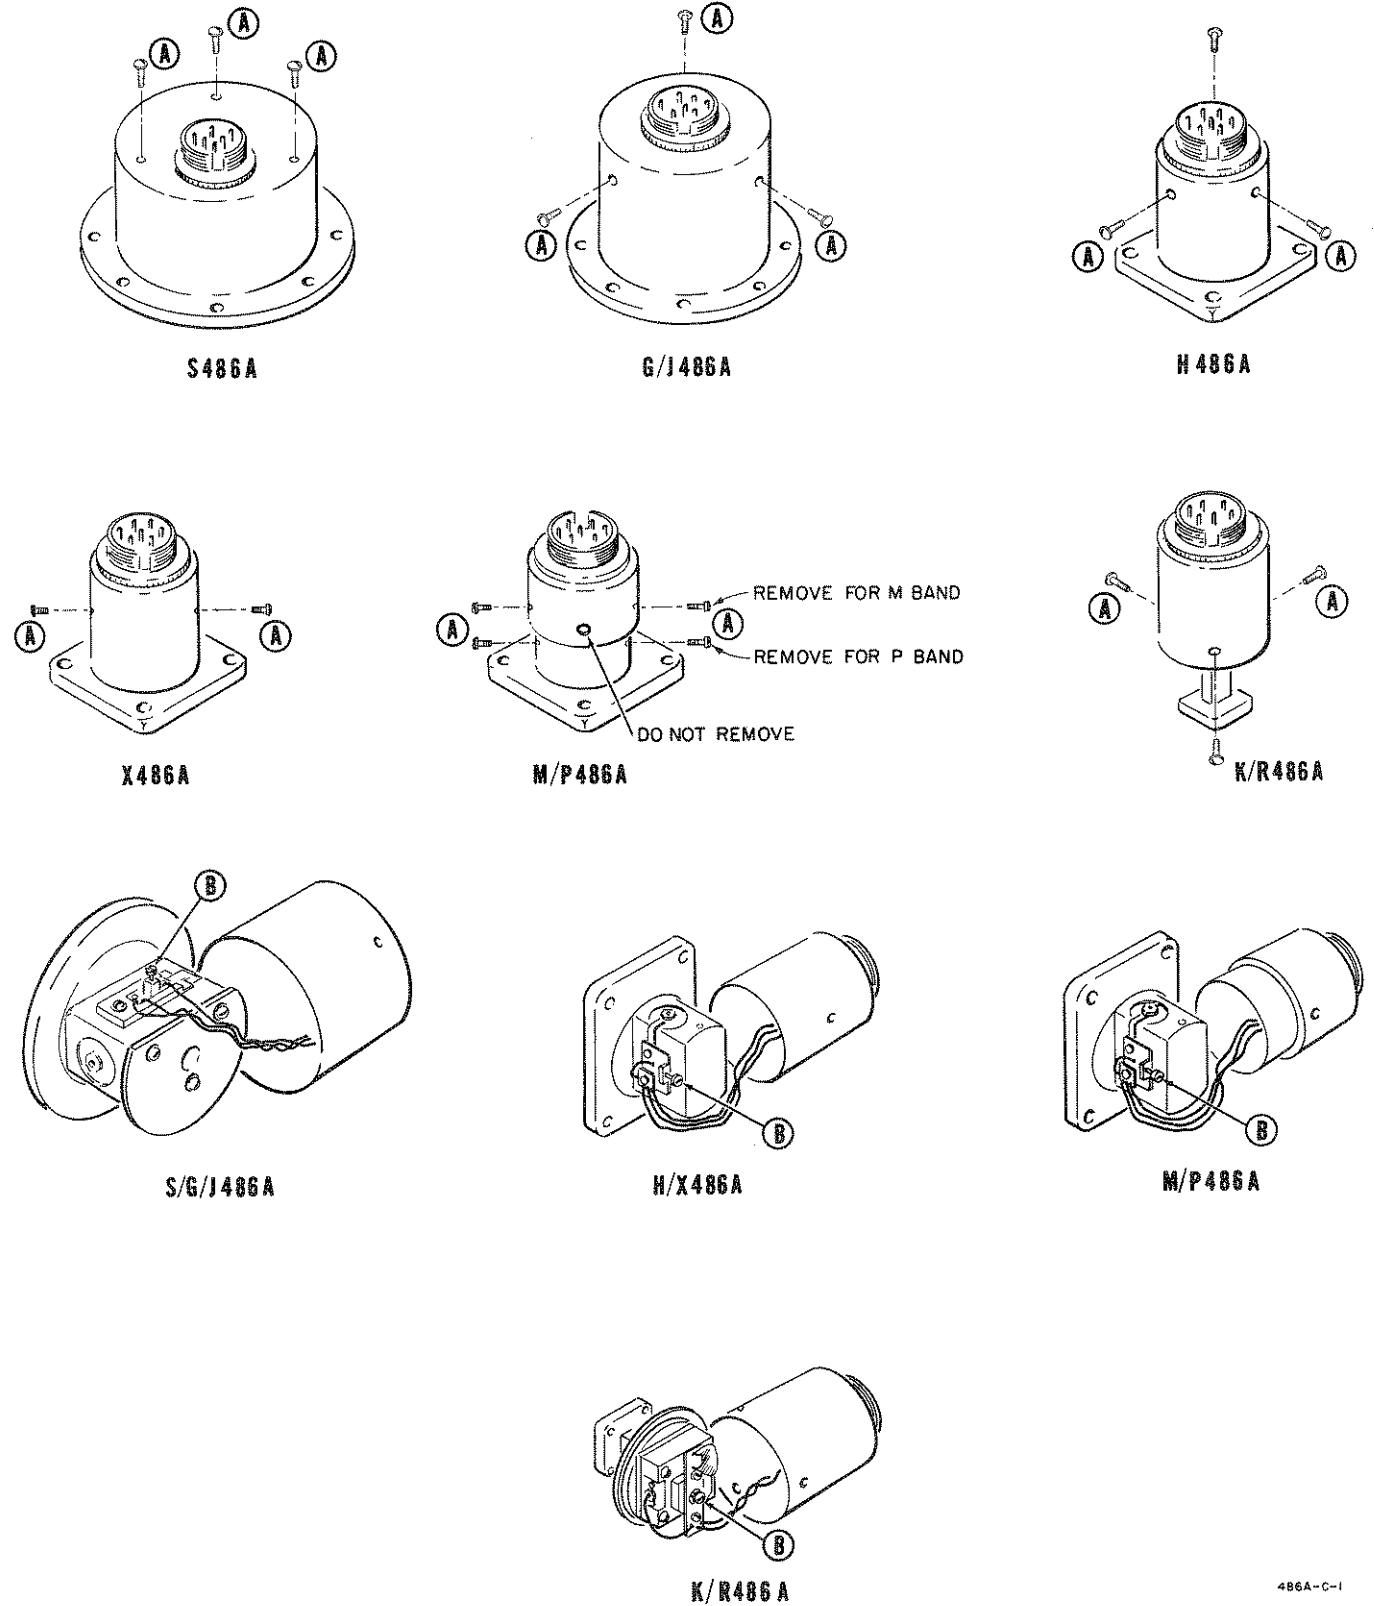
Cover Screws (A) and Compensating Screws (B) in Model 486A Thermistor Mounts
